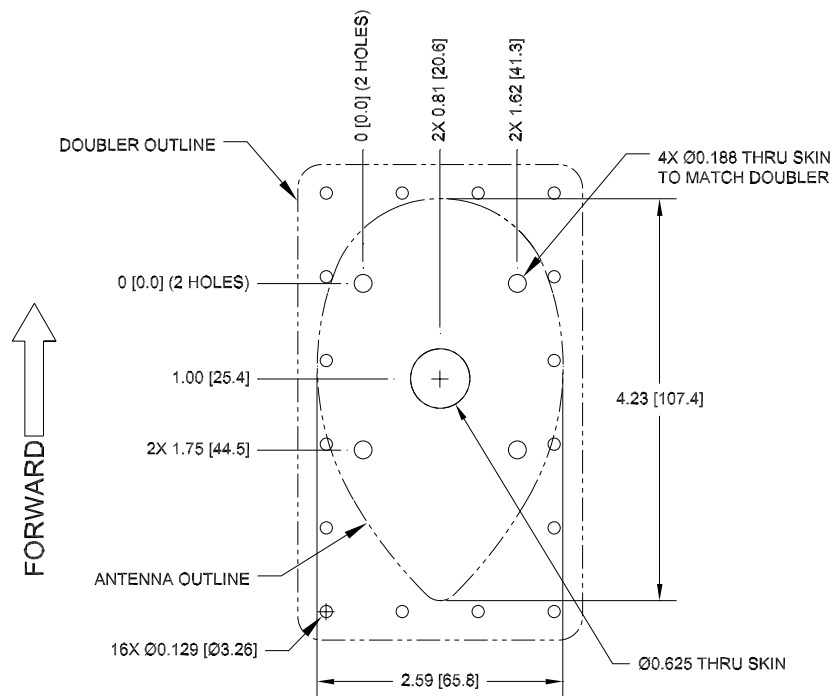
Skin Cutout Detail, Teardrop Footprint Antenna, Skin Thickness 0.032" to 0.049"
